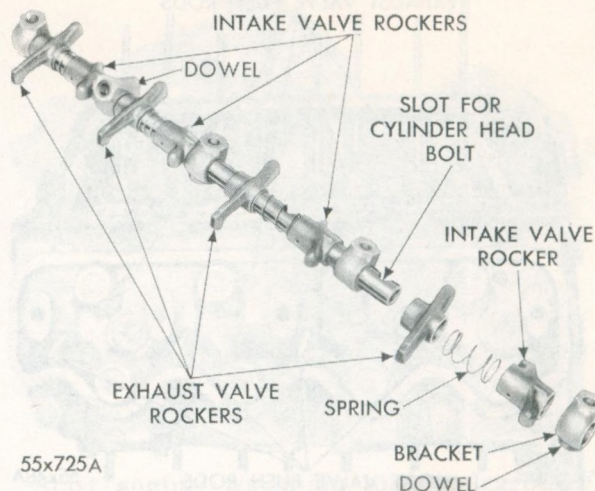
Rocker Shaft Assembly (Disassembled View)
